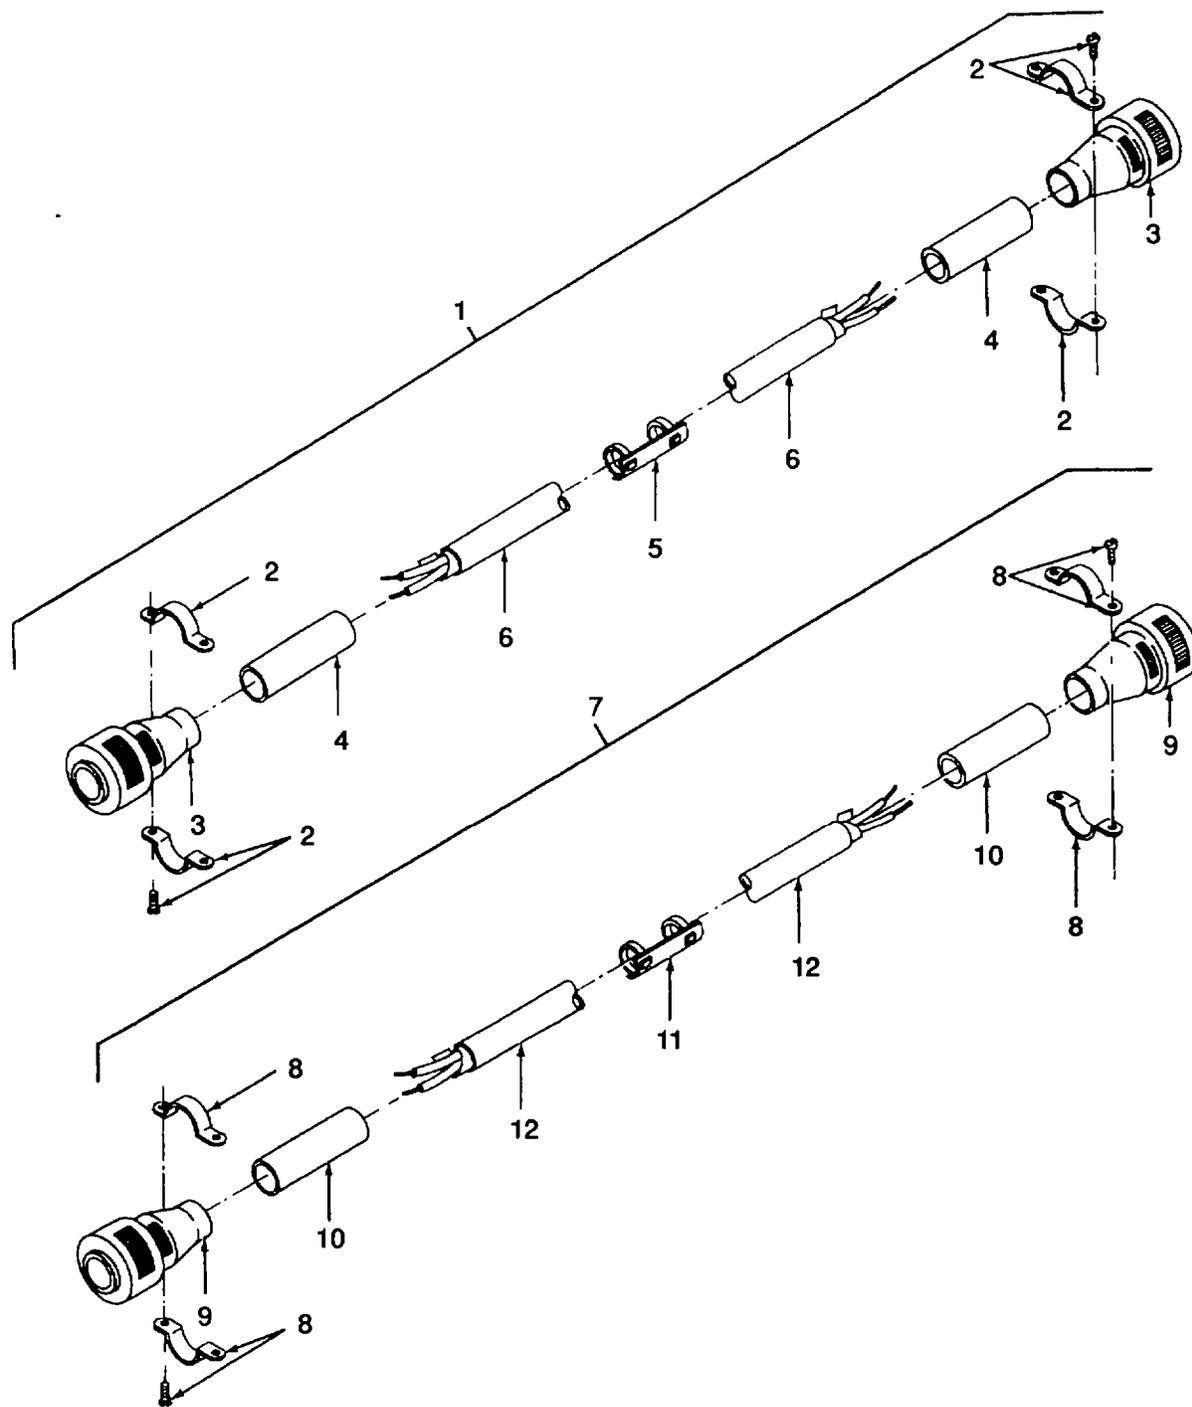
Parallel Cable Assemblies (Sheet 1 of 2)
